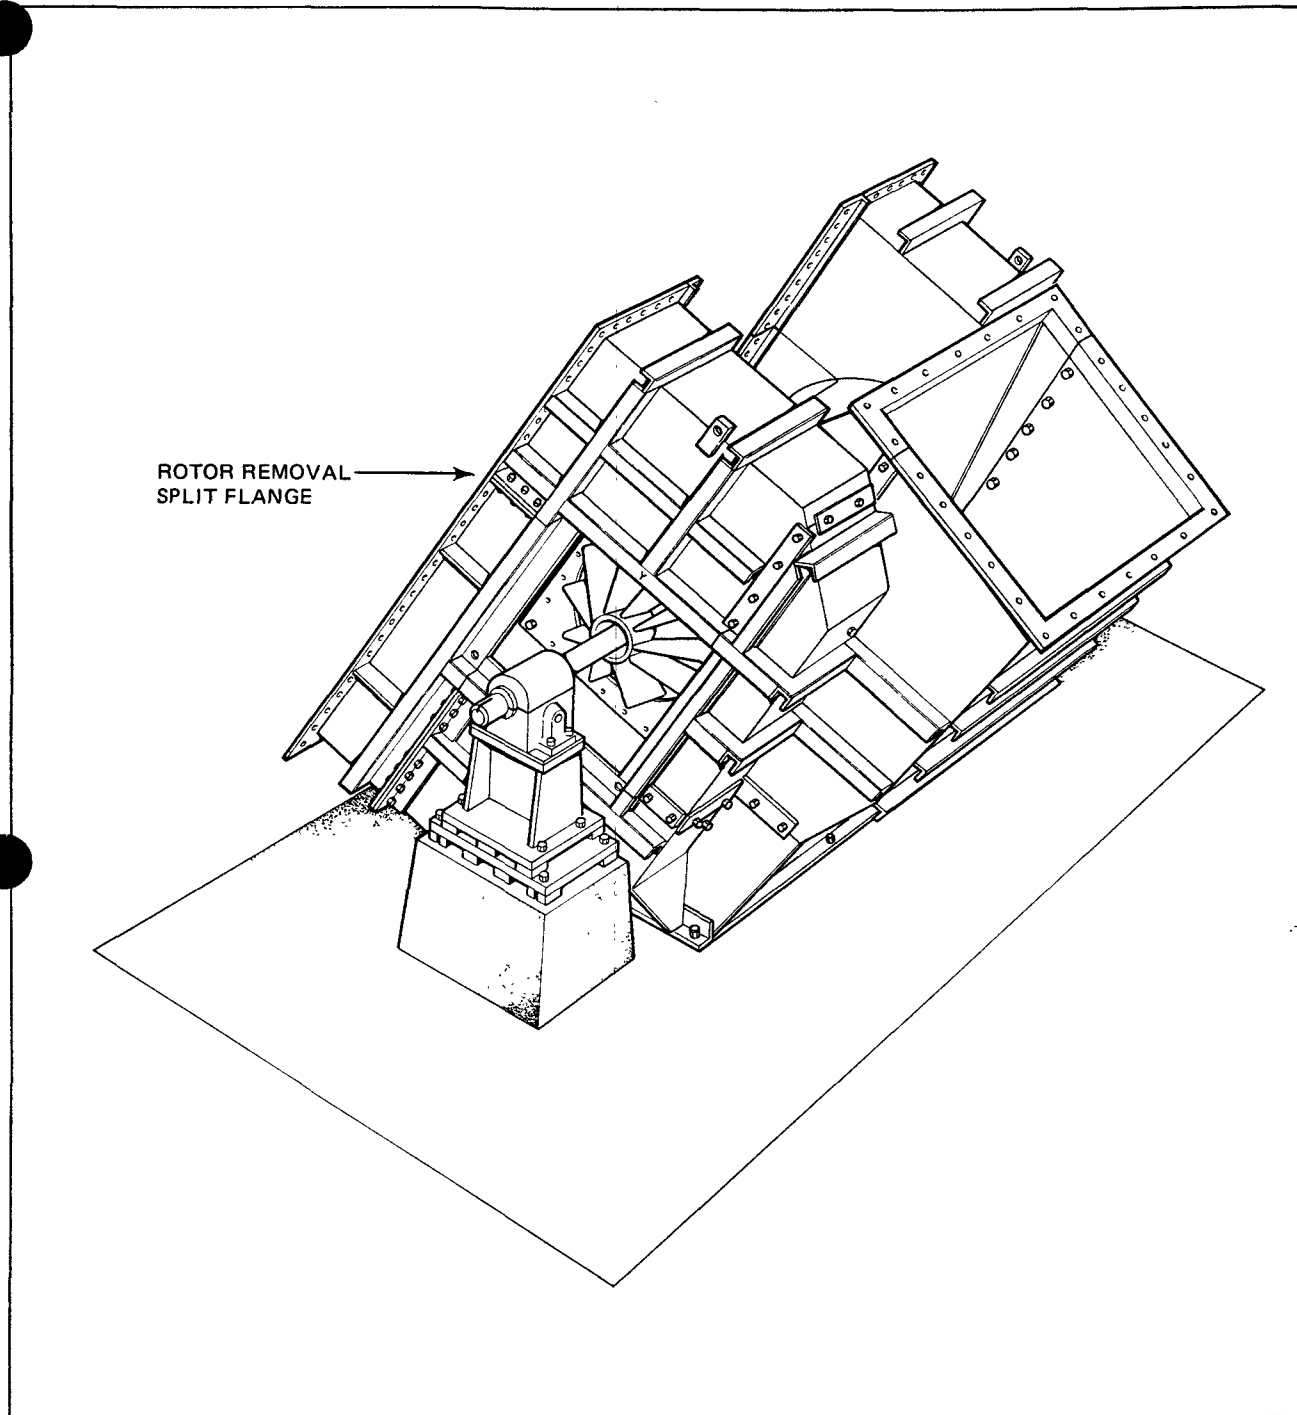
Housing Construction - Type 4 Tenth Erection Stage
